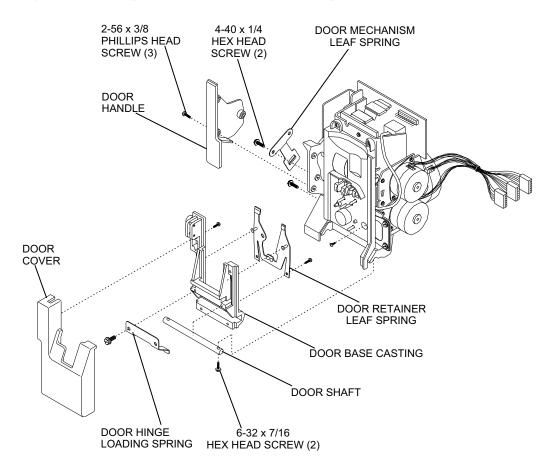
Door Assembly and Door Handle Assembly Replacement
